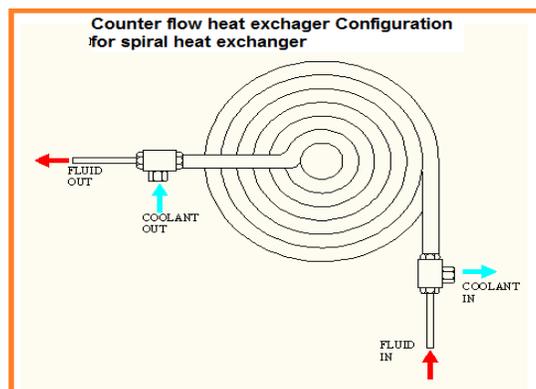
Arrangement of the Spiral tube in tube heat exchanger in Counter flow configuration
